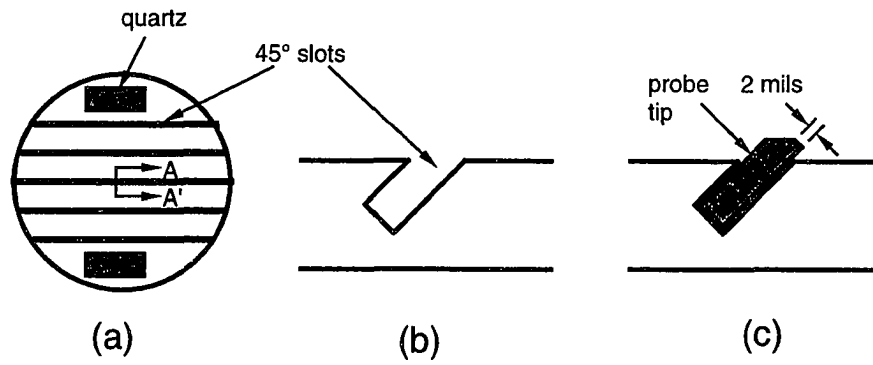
Angle lapping fixture for quartz probe tips: (a) top view of the lapping fixture, (b) cross sectional view of AA', and (c) final shape of the lapped probe tips.
